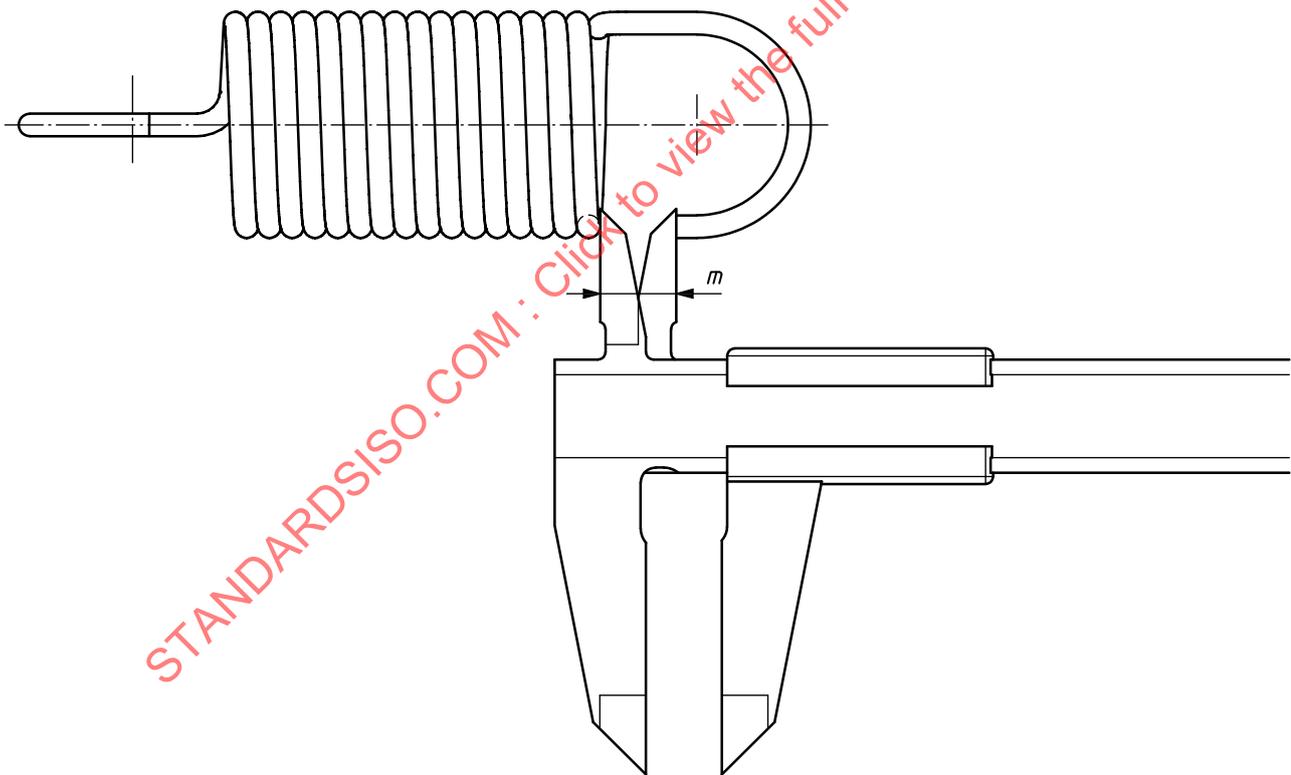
Method of measurement of hook opening (m) with calliper (example)
